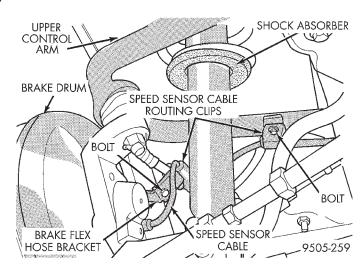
Speed Sensor Cable Attachment To Rear Suspension
